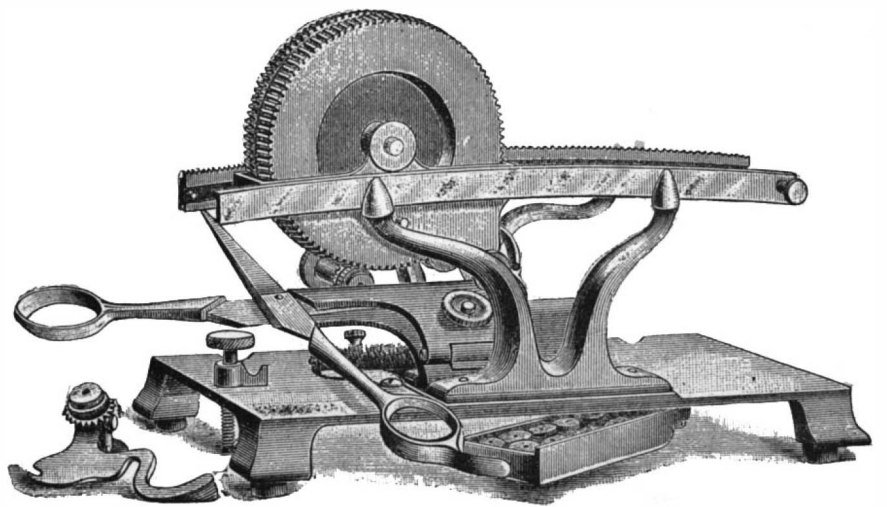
THE MACHINE ARRANGED FOR SHARPENING SCISSORS.
